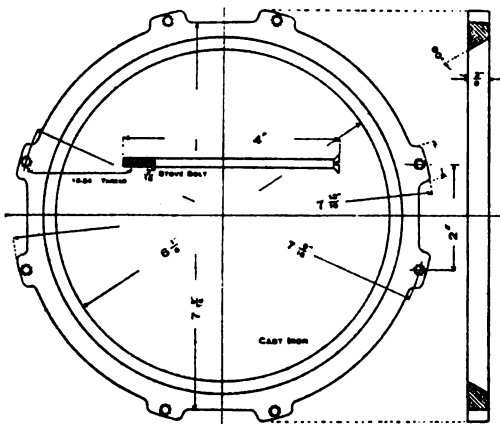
RING FOR CLAMPING STATOR SHEETS IN FRAME
